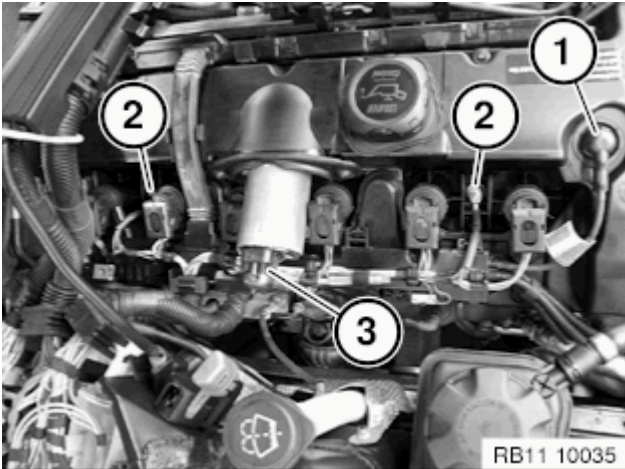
Unlock Connector Of Eccentric Shaft Servomotor And Detach
